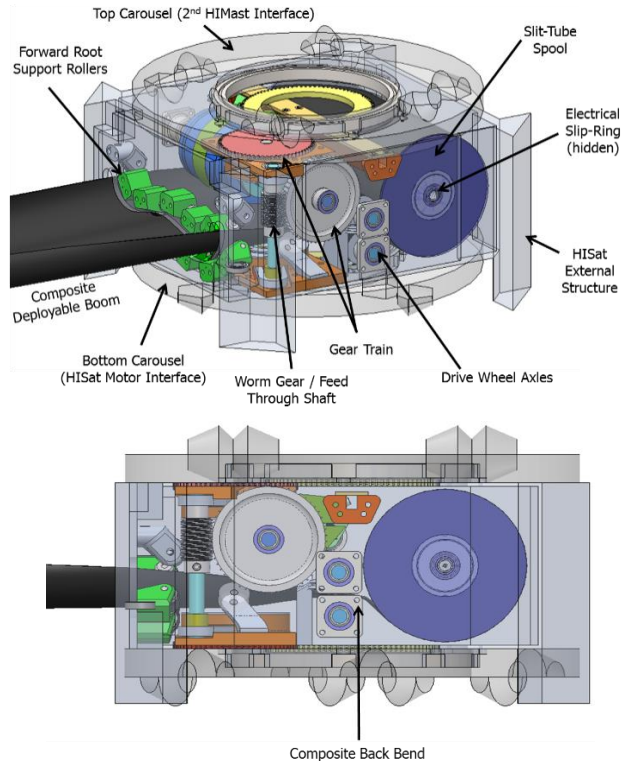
HIMast Layout, dimetric view (top) and side view (bottom).
